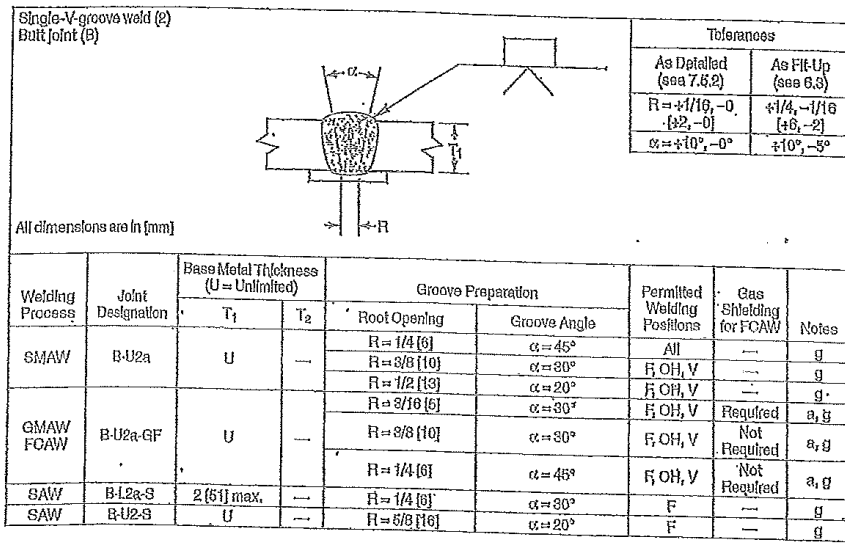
B—Prequalified Complete Joint Penetration (CJP) Groove Welded Joint Details
